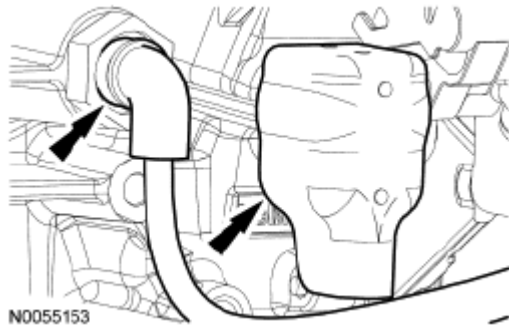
Locating Block Heater Electrical Connector & Heat Shield
